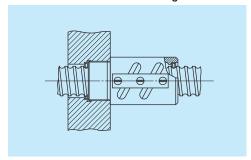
Installation of brush-seal to a ball nut with thread screw
